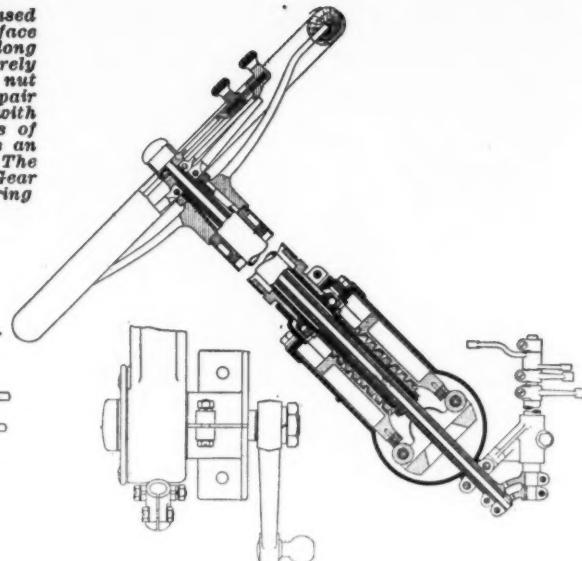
Above—The Jacox steering gear has a substantial steel worm inclosed by a semi-steel nut, which is split lengthways into halves. The worm is double threaded, both right and left hand, so that turning the wheel causes one half nut to rise while the other falls. The ends of the nuts bear upon a rocking yoke which is connected to the external steering arm. One of the greatest virtues of this design is that a single adjustment of the nut that backs the ball thrust race takes up all wear. Owing to the very large thread surface wear is very slow. The maker is the Jackson-Church-Wilcox Co.
